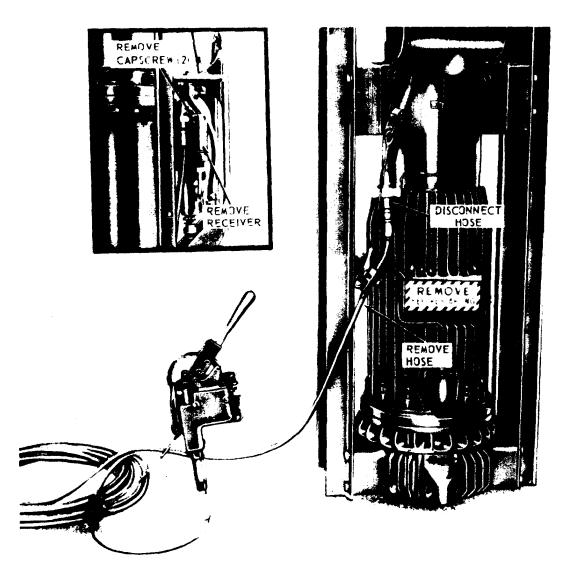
Hydraulic hose, receiver, and transmitter, removal and installation.
